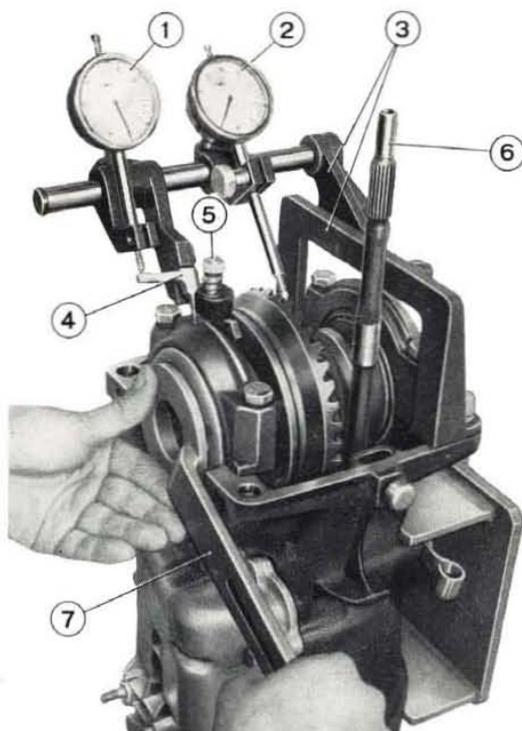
Setting differential cage bearing preload by means of fixture A. 95688.
